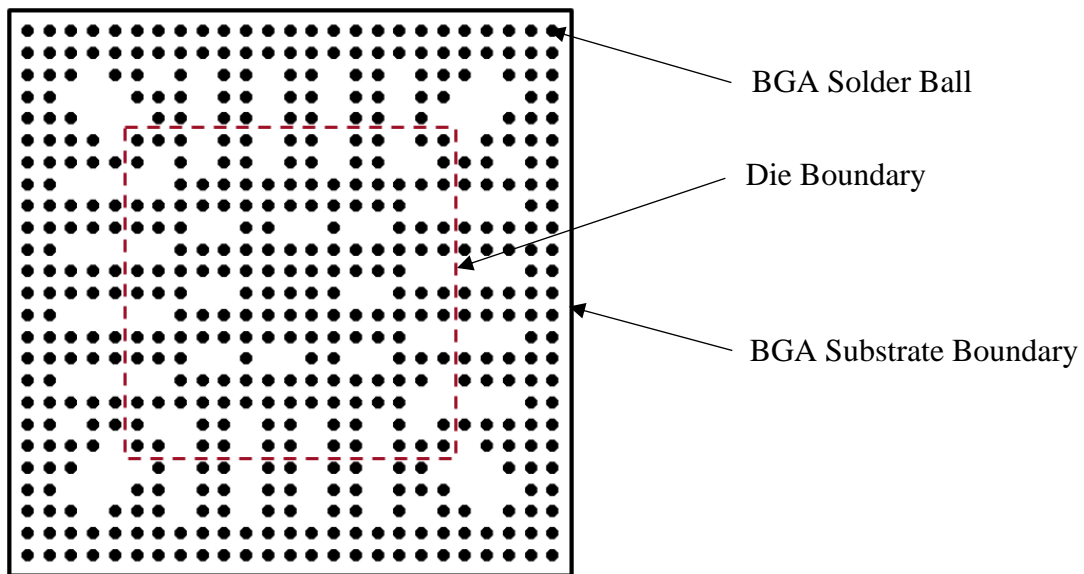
BGA solder ball footprint of Type-A 17 x 17 FCBGA test vehicle
